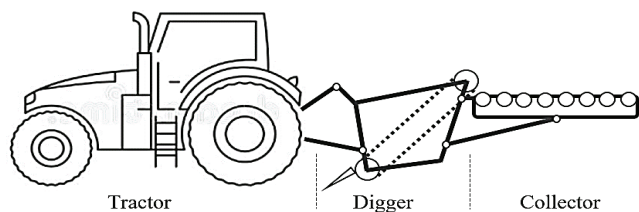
Arrangement of the carrot harvesting machine conjugate.
